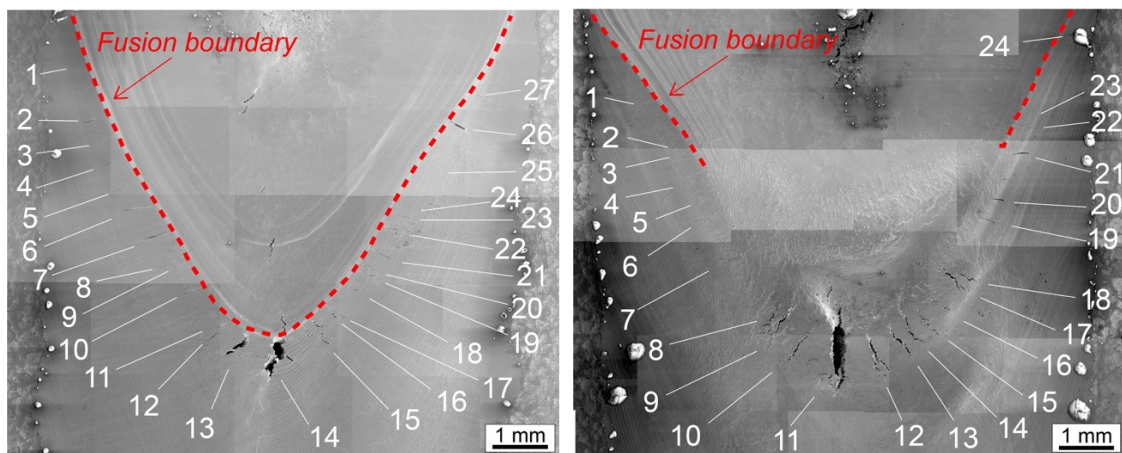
Cross-section of weld bead and weld bead surface at each wire current.
